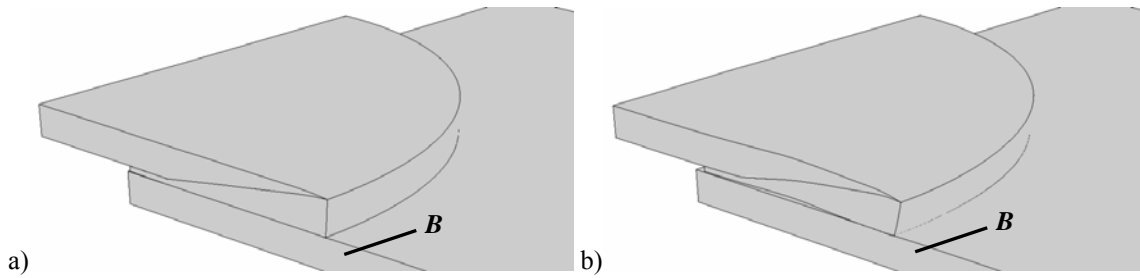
Deformed shape of the 1.2 mm patch inner chamfer repair at damage onset (a) and patch debonding (b) (compressive load).
